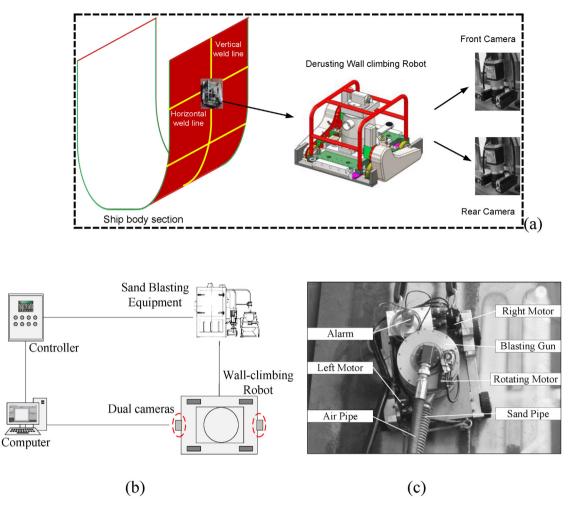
Weld line detection and tracking system platform: (a) sandblasting wall-climbing robot platform, (b) control structure of the sandblasting wall-climbing robot, and (c) sandblasting wall-climbing robot.
